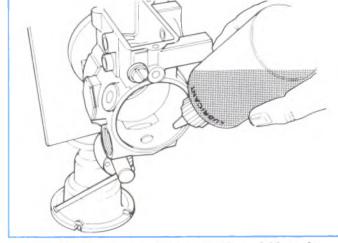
, Installing Thrust Sleeve and Checking Weights.
